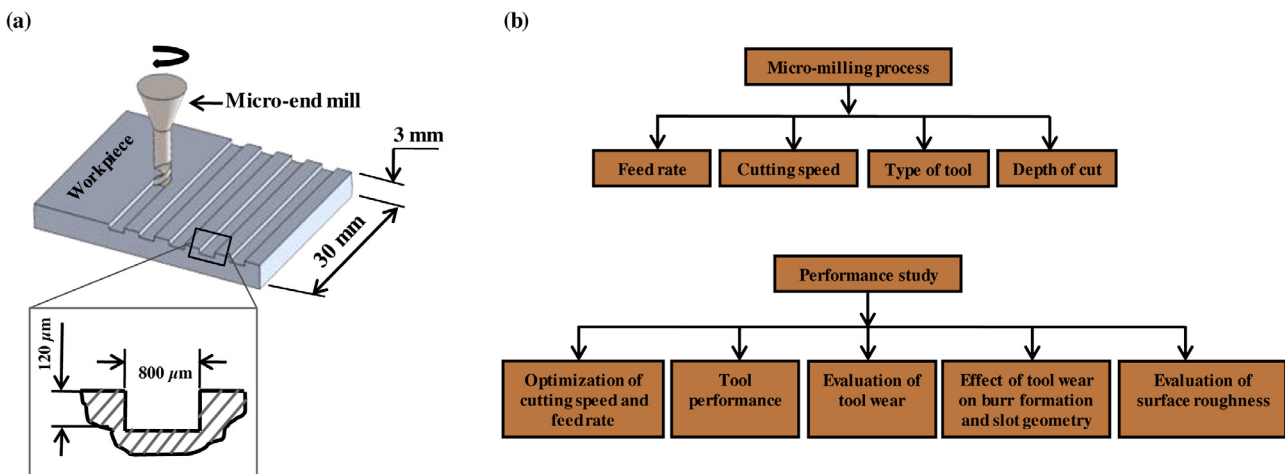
(a) Schematic illustration and (b) layout of the micro-milling process.
